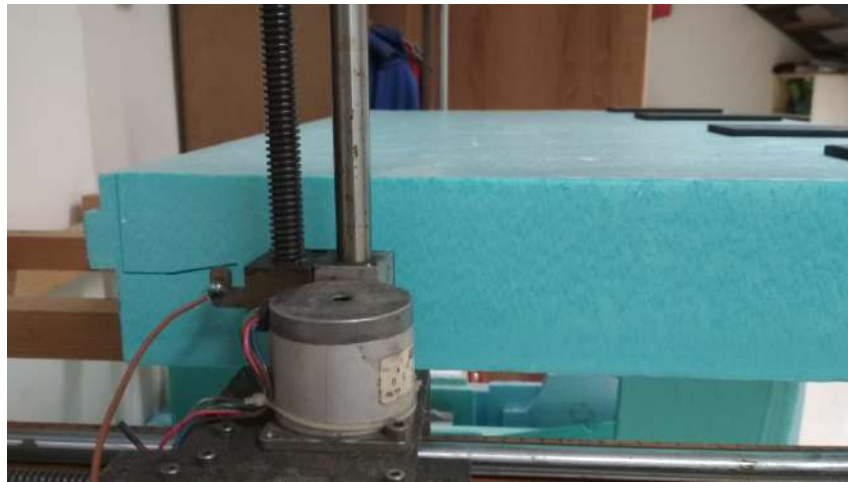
Detail of the hot wire machine machining the polystyrene block
